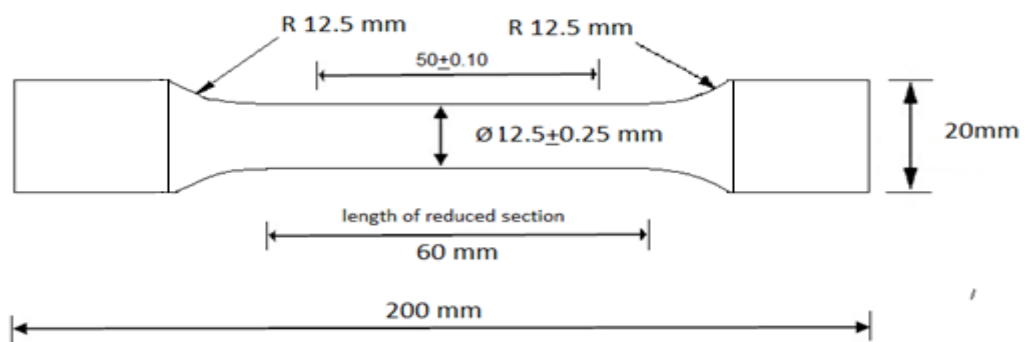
Tensile test specimens according to ASTM E8-11 Standard [34]
